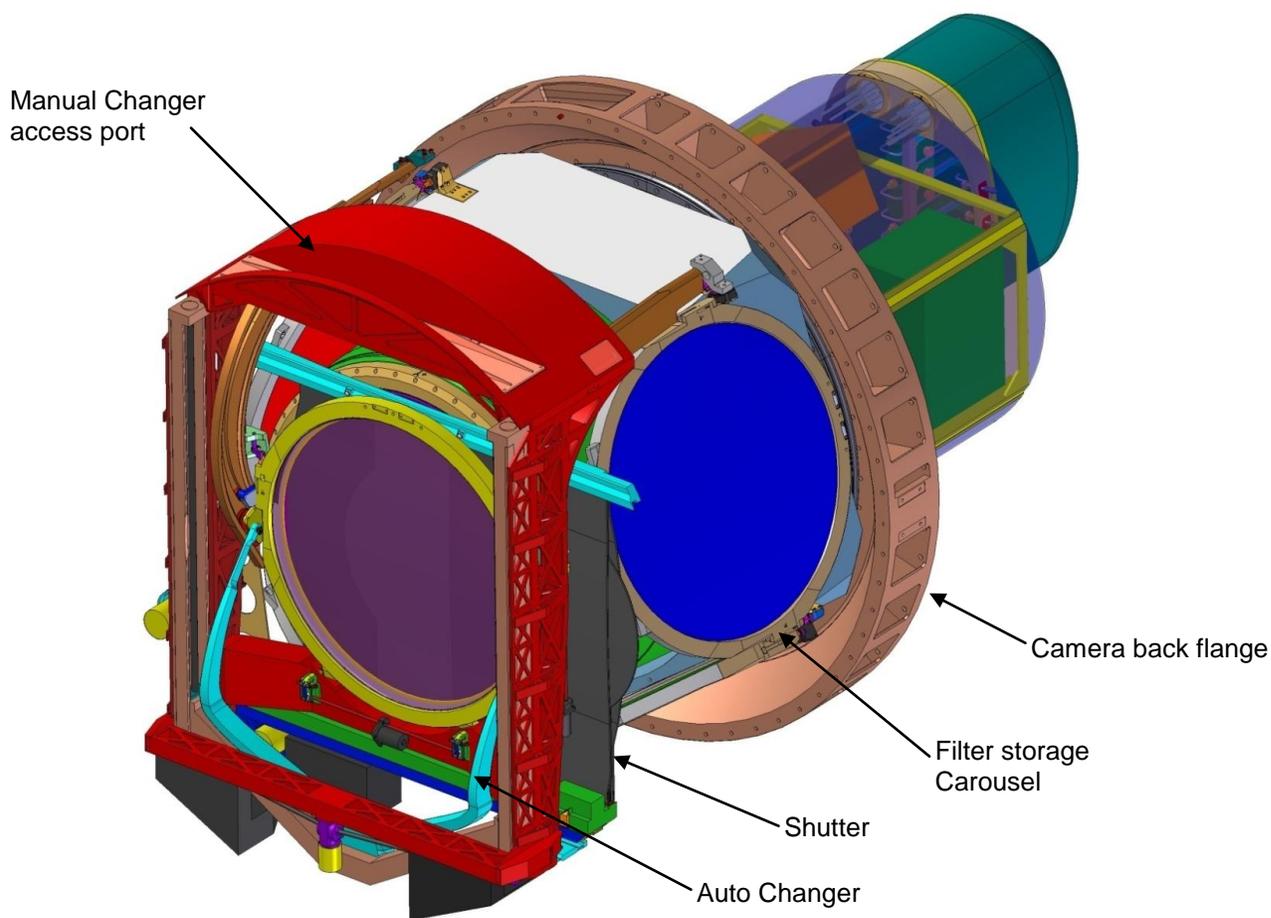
Camera Partial Assembly Showing Filter Exchange System
